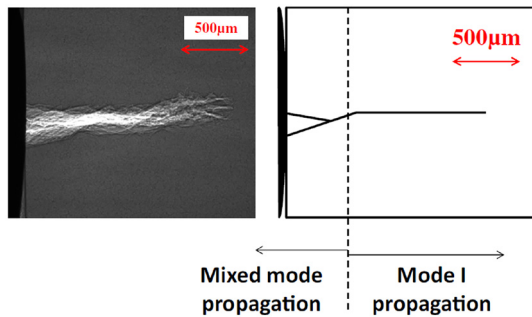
Distinguishing modes of fretting fatigue crack propagation using X-ray radiography [85].
